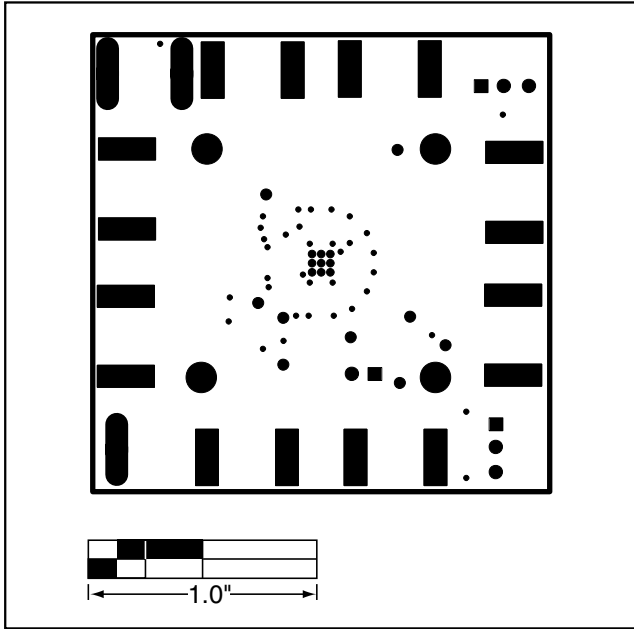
MAX3800 EV Kit PC Board Layout—Solder Side
